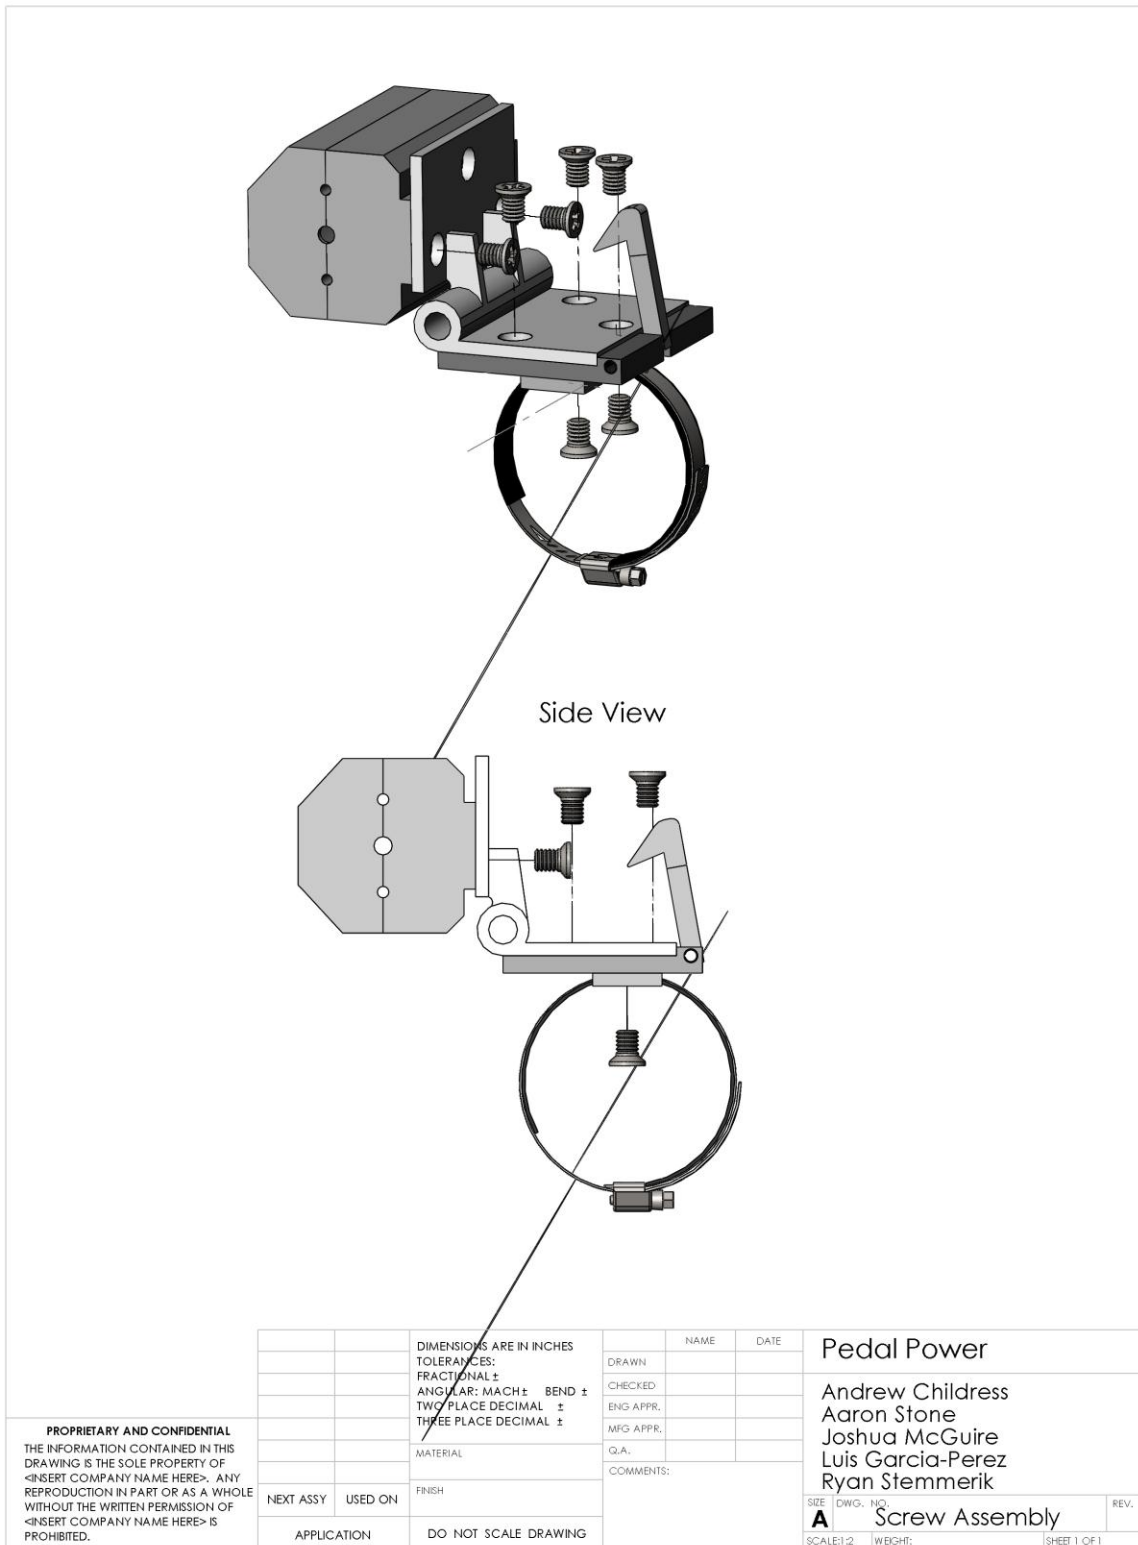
Complete generator enclosure and mounting bracket assembly.
